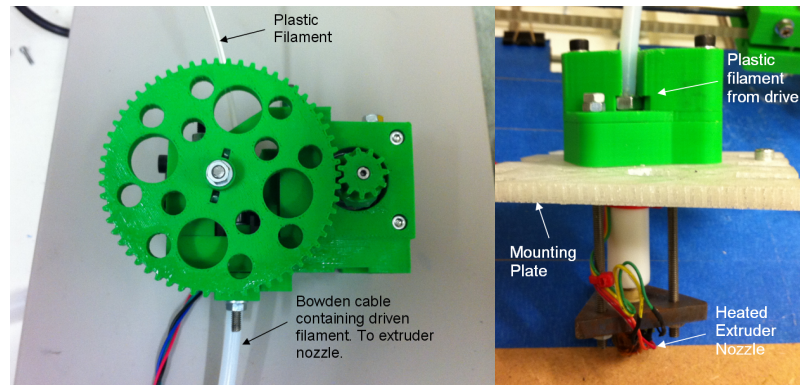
Thermoplastic bowden extruder drive mechanism (left) and nozzle (right)
